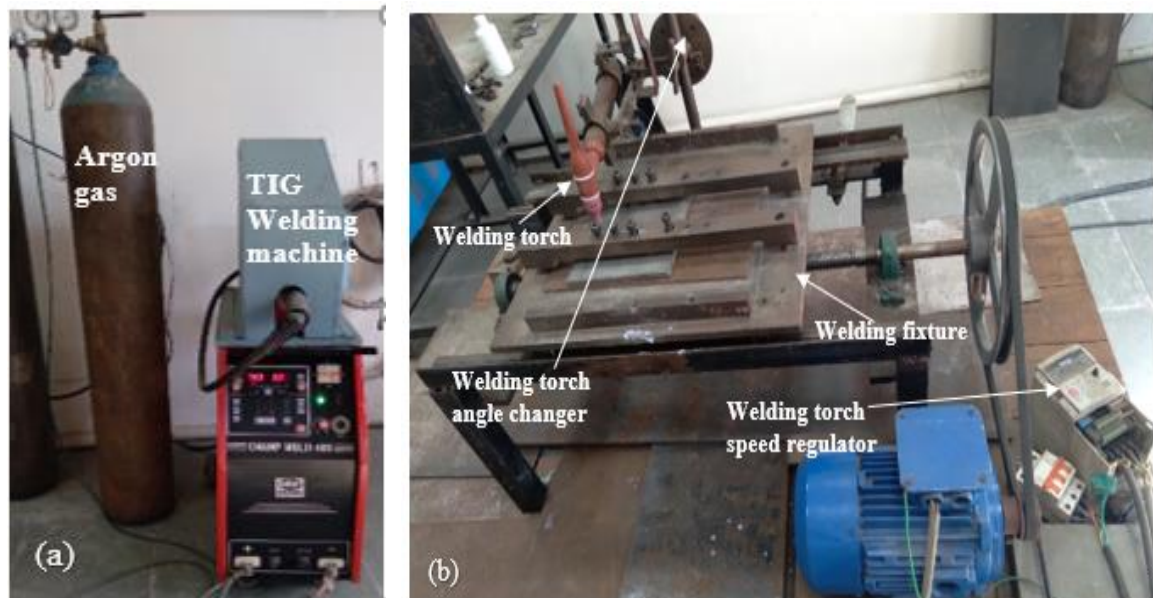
A-TIG/FB-TIG/FZ/TIG welding (a) setup and (b) fixture
